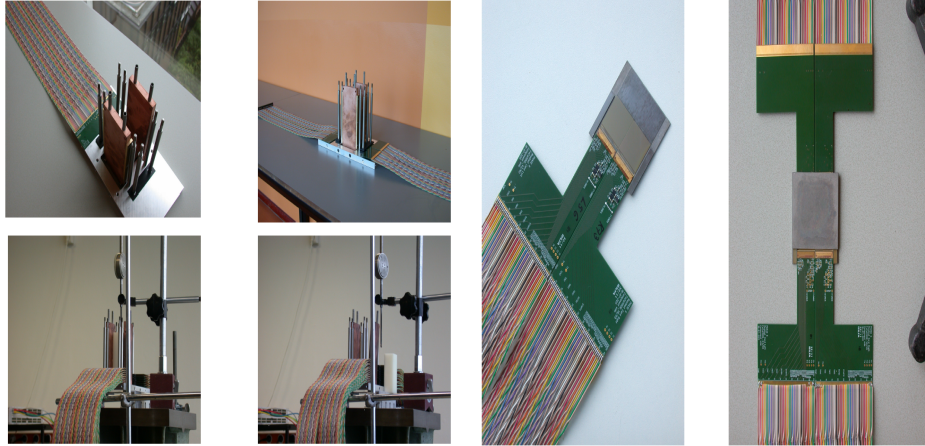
a) Assembly of the tower of the FoCal prototype with the copper plates used for cooling seen in upper left image and b) MIMOSA chips mounted on PCBs, with two chips with a tungsten plate mounted in the left one and a complete layer in the right one.[10]
